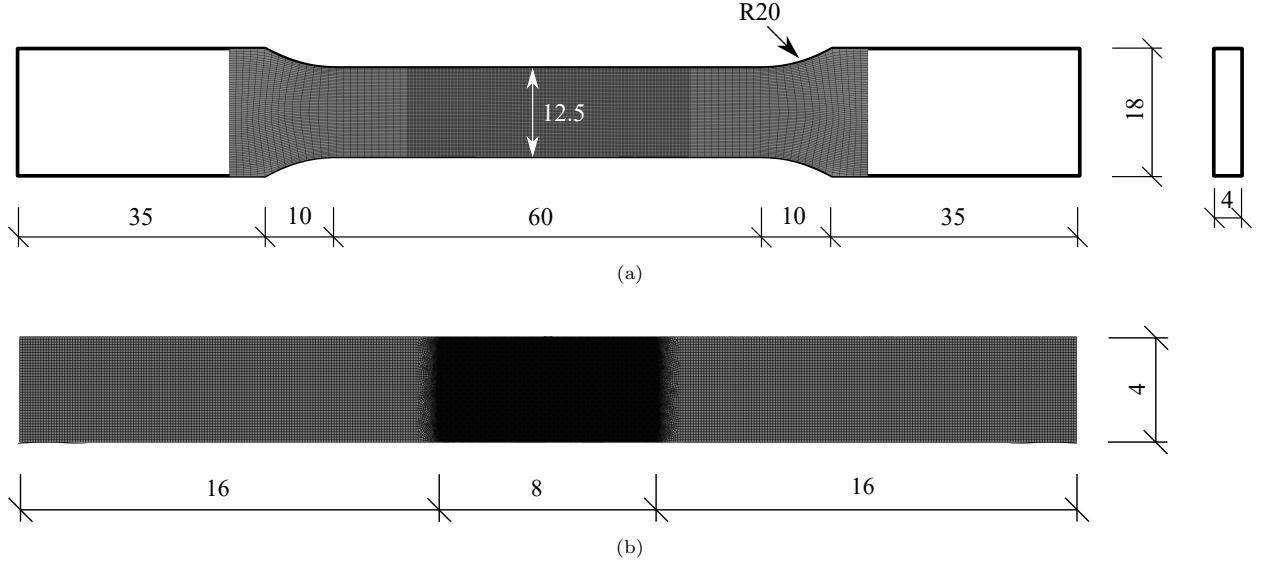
Specimen geometry and finite element mesh: (a) flat tensile specimen, and (b) bending specimen. The width of the bending specimen was 38 mm, and 32 mm for profile A and profile B, respectively. Dimensions are in mm.
